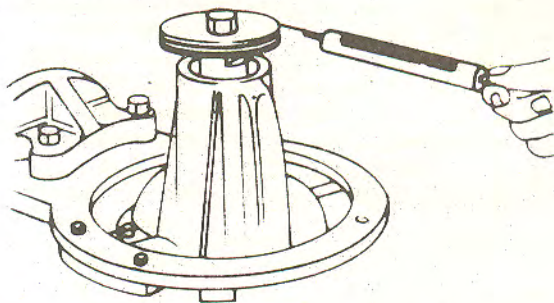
Checking the pinion bearing pre-load by means of a spring scale attached to the flange.
